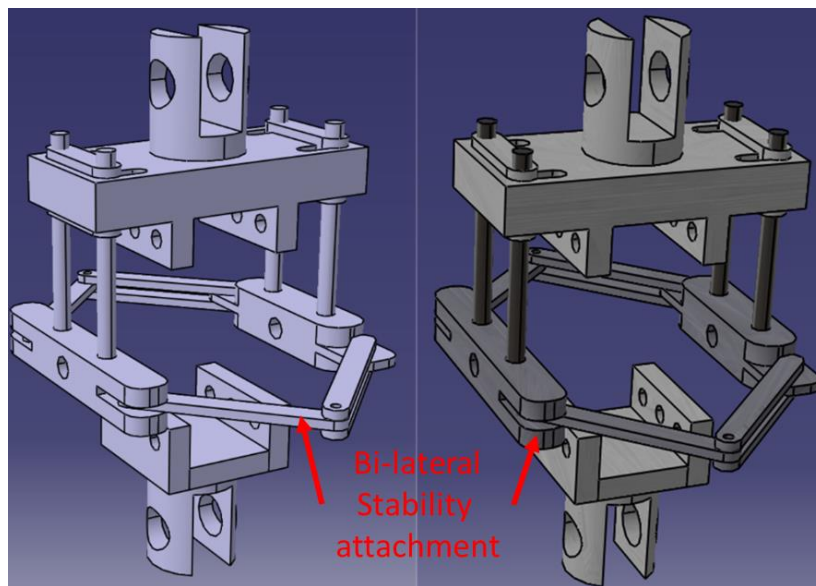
Design of the pre-crack rig CAD model Type C version 3
